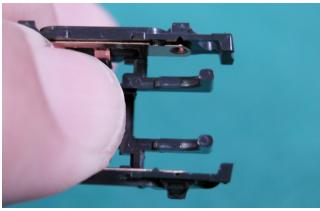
Hold it in place and insert the other pick-up. Hold them both in place with a thumb.
